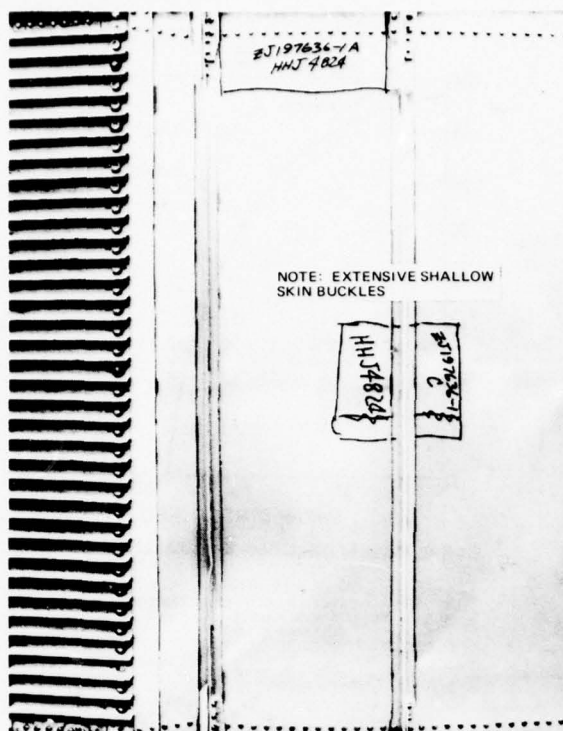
SHEAR AND COMPRESSION FAILURE - FRONT VIEW
